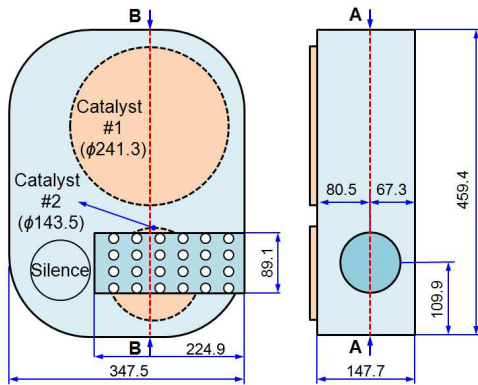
Detailed sketch of plenum chamber and multi-perforated tube
